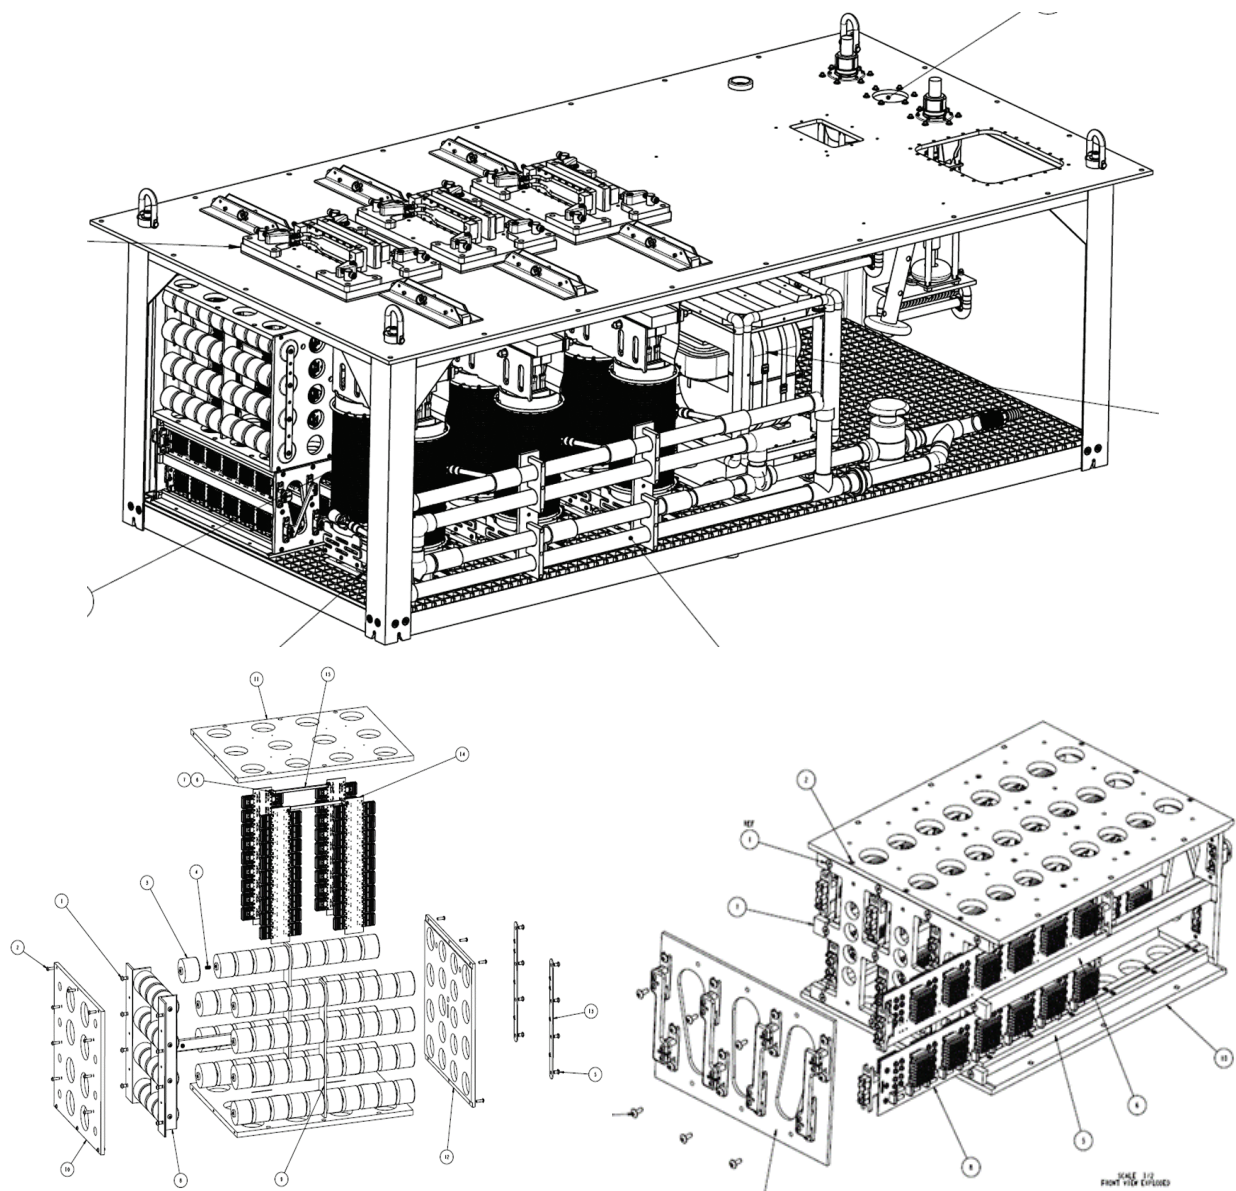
Components mounted in the oil-filled high voltage tank shown in the upper view. Exploded views of the resonant capacitor assembly and rectifier assemblies are shown on the left and right, respectively, in the lower view.
